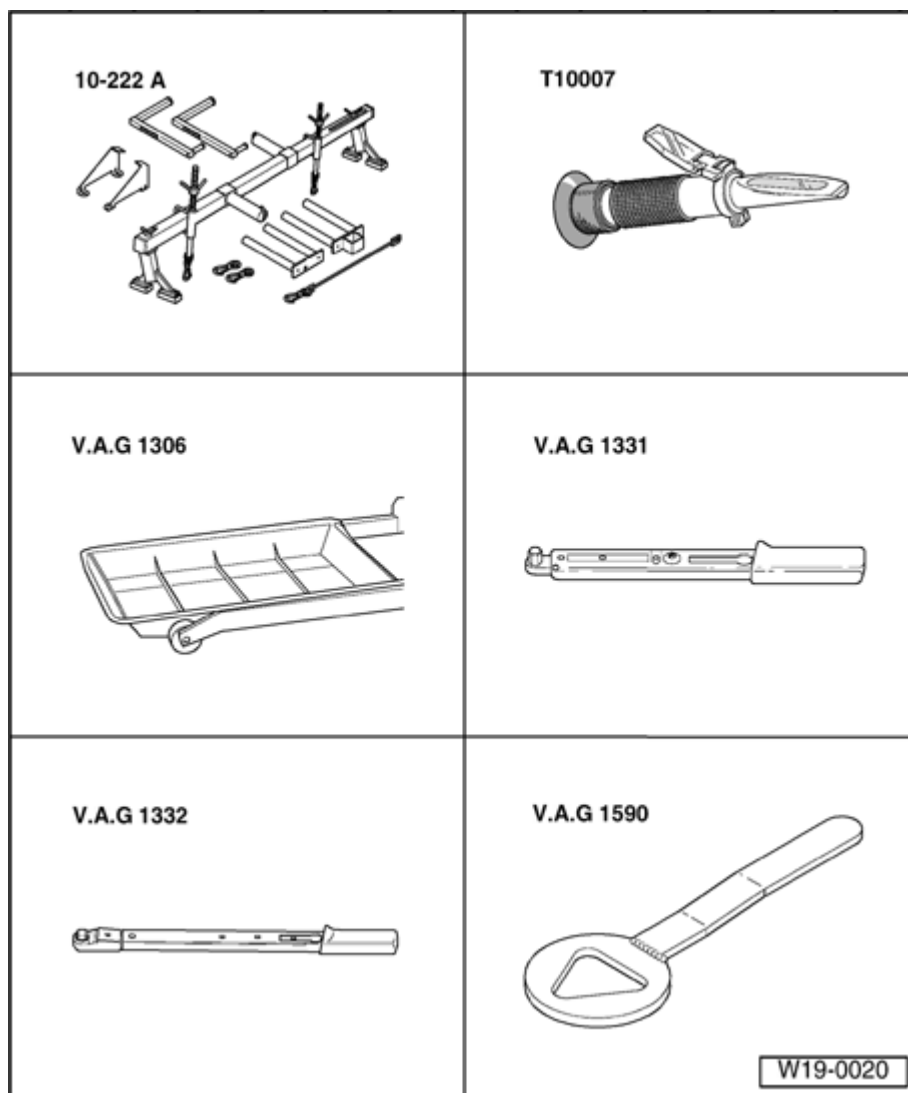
Identifying Special Tools - Coolant Pump, Removing And Installing
